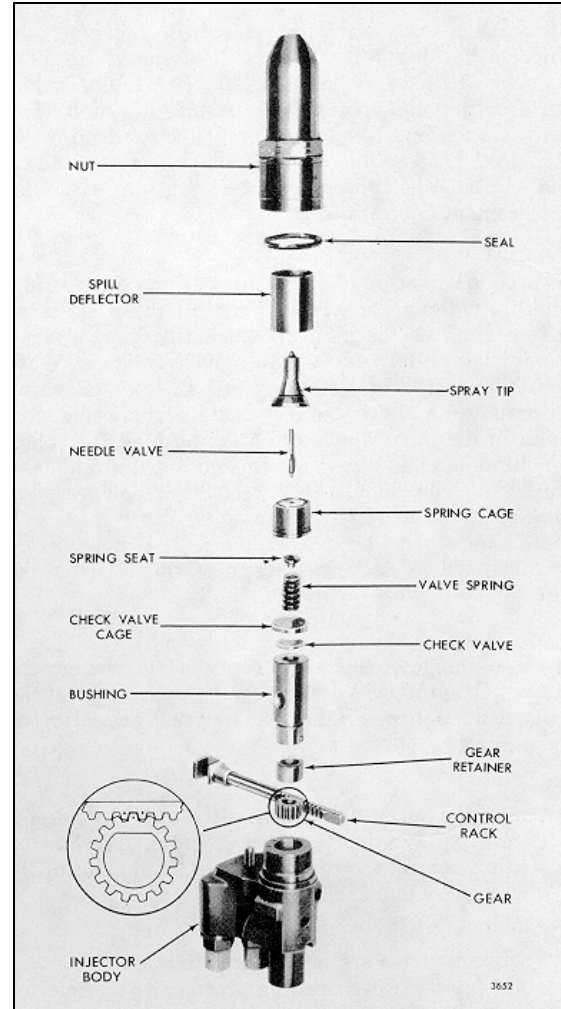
Injector Rack, Gear, Spray Tip and Valve Assembly Details and Relative Location of Parts
